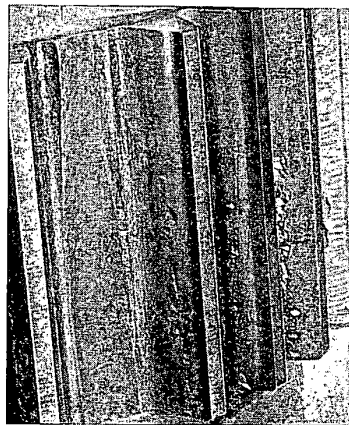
Spur gear with destructive pitting and spalling.
